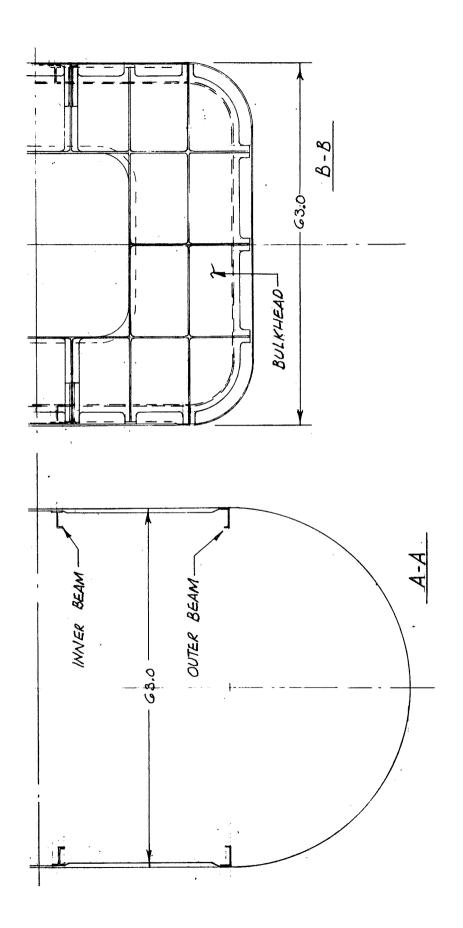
Centrifuge Structural Arrangement - Concept No. 1A
